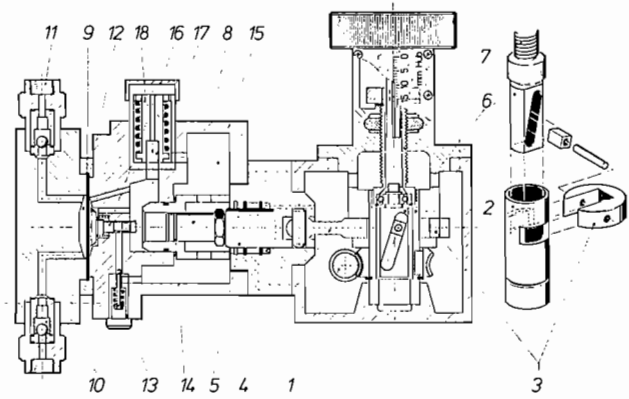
Compact Diaphragm Metering Pump—1) – 7) eccentric stroke adjustable drive unit, 8) – 14) plunger seal, 9) diaphragm, 10) – 11) pump valves, 12), 13), 15) – 18) hydraulic system.
